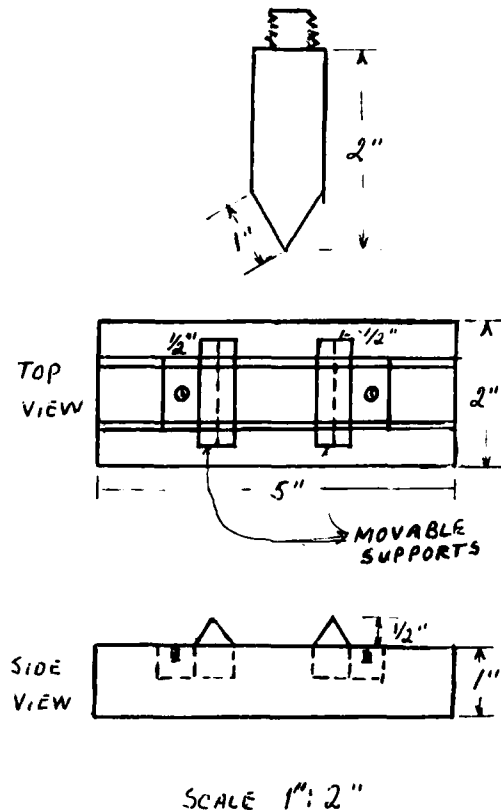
Three point Load Assembly for Testing Modulus of Rupture of Dental Porcelain Using an Instron Machine.
